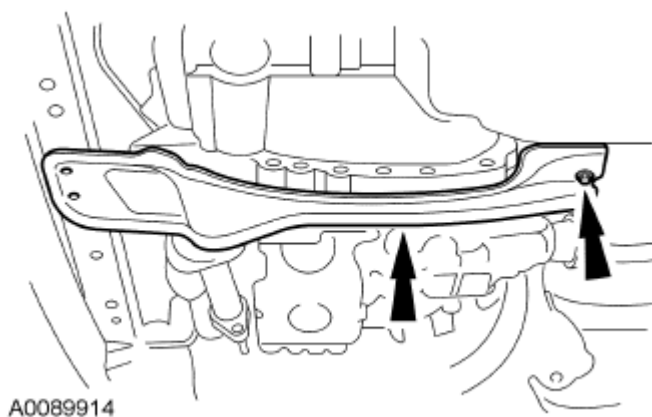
Locating Rear Nut And Engine Support Crossmember
